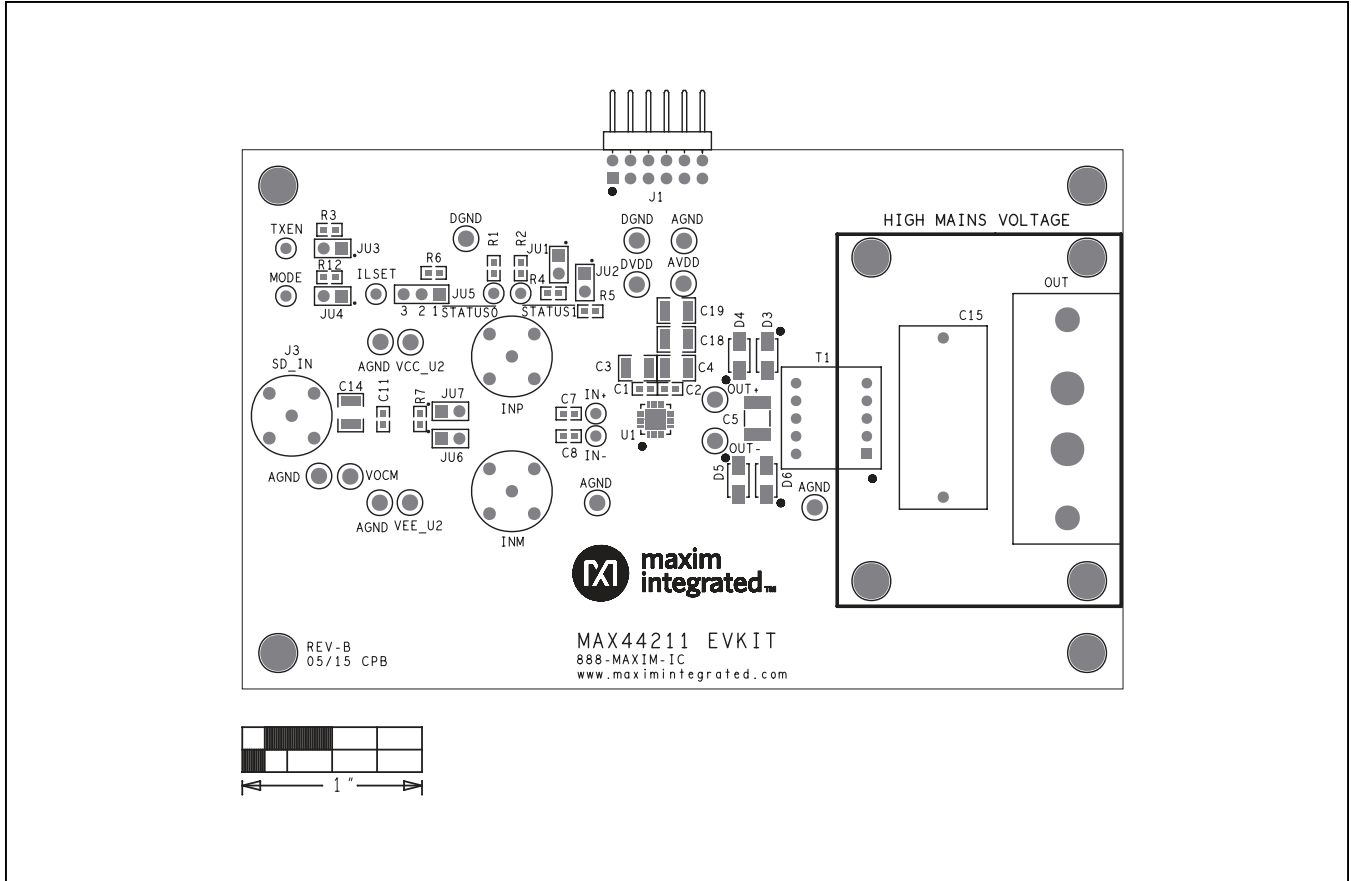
MAX44211 EV Kit Component Placement Guide—Component Side
